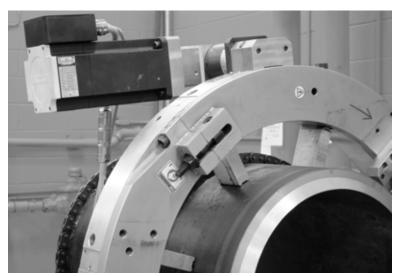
The SDE for LCSF machines is equipped with a right-angle adapter. The adapter mounts directly to the standard pinion assembly.
